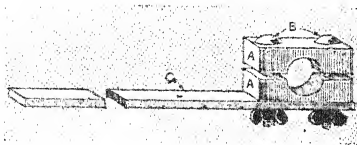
LAPPING TOOL. A, lead blocks. B, binding bolts. C, steel handle.
